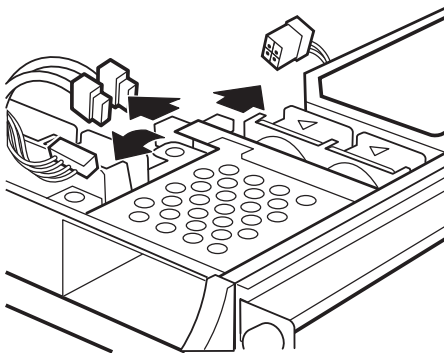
Disconnecting Cables From the SAS IF Assembly
